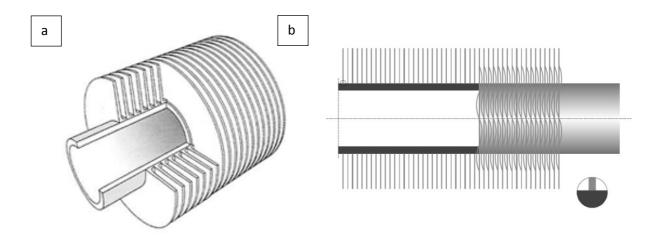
Examples of finned tubes produced: a) finned tube type G, b) finned tube type Z [8]
